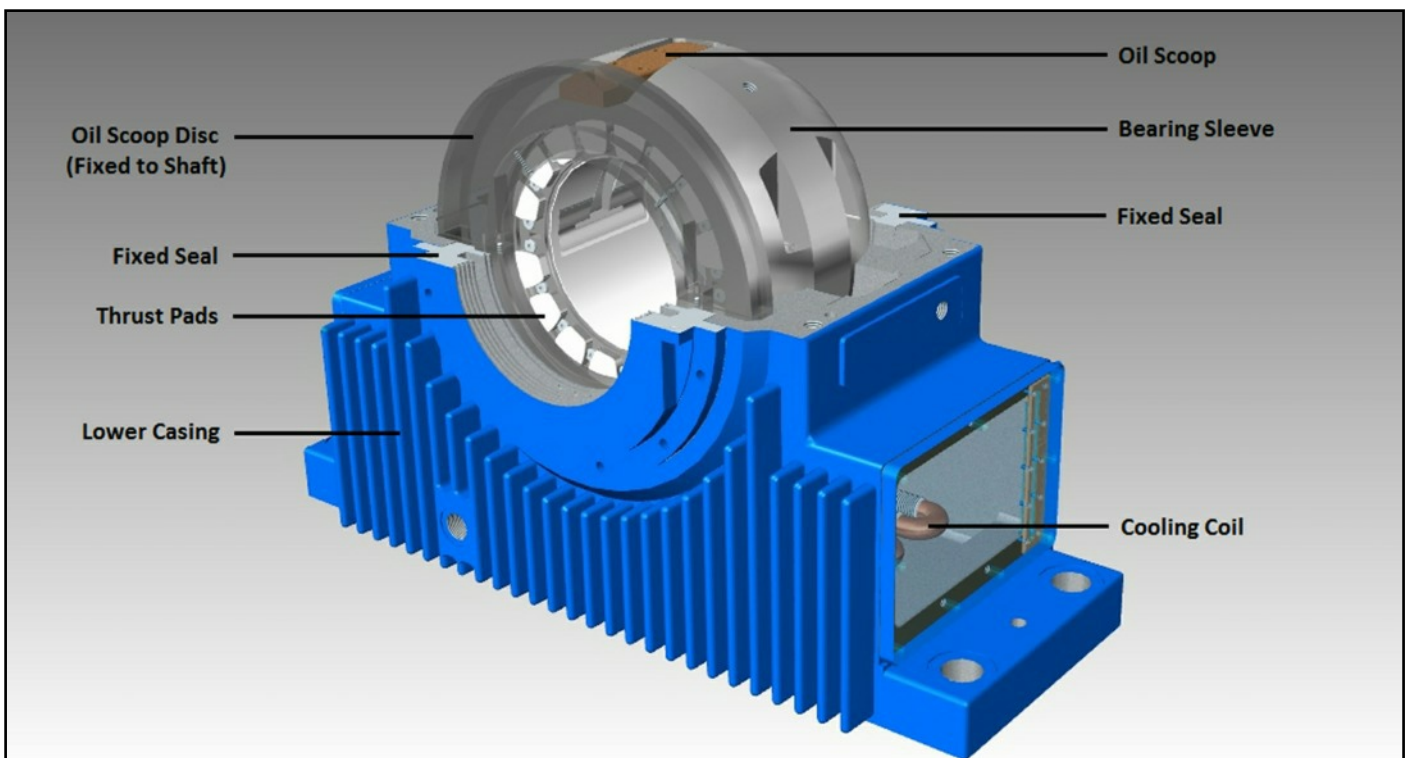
3D view of typical HSSF unit with top casing cover removed
